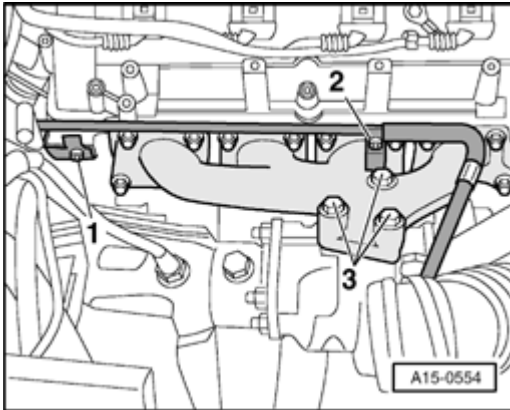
Removing Bolts Of Oil Supply Line & For Turbocharger
